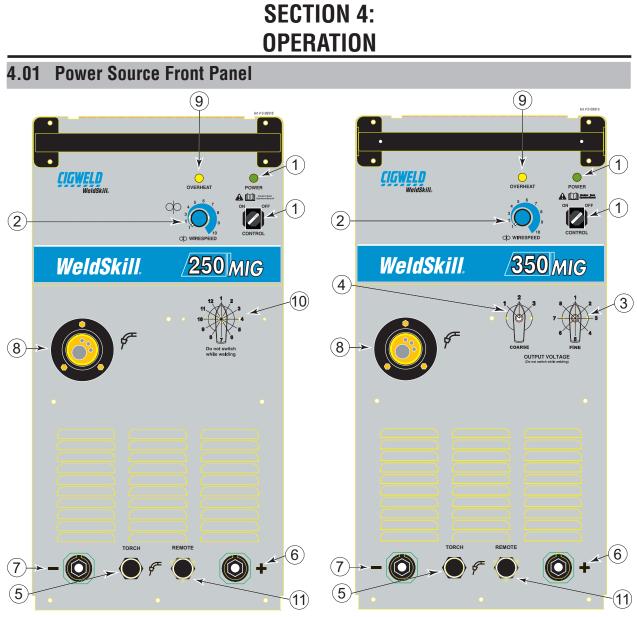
WeldSkill 250 & 350 MIG Front Panel
